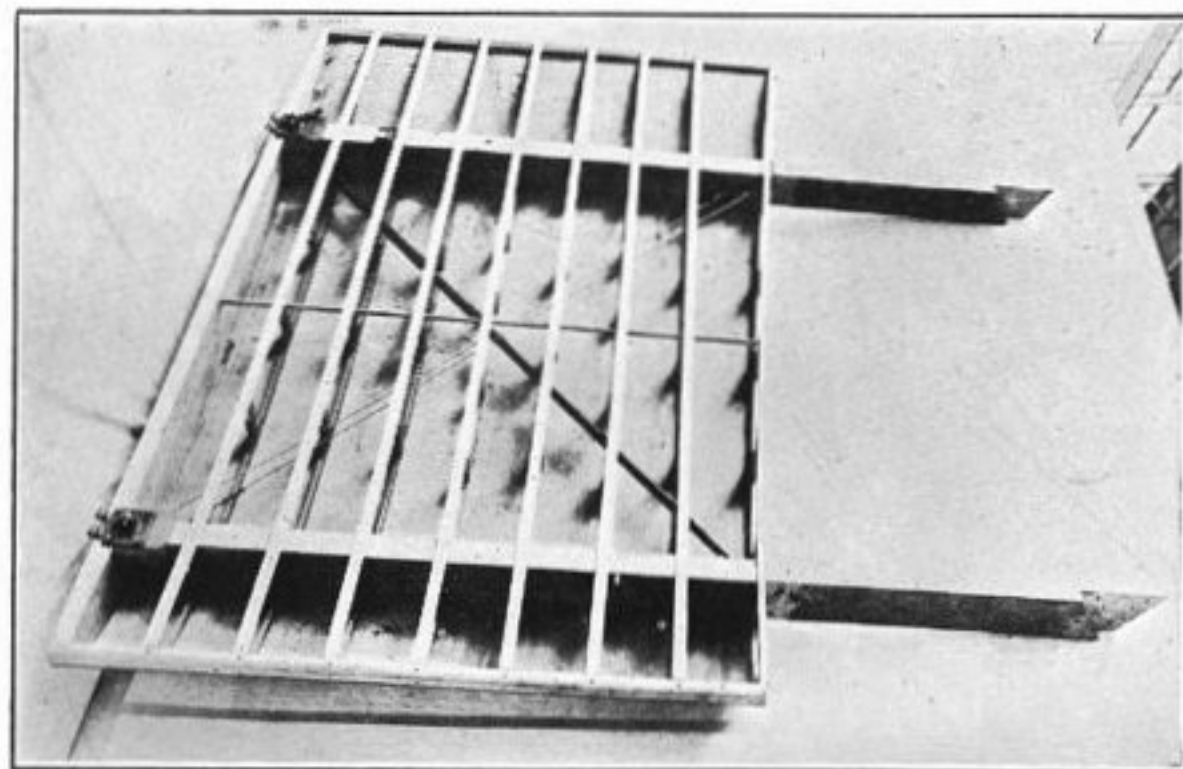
SIDEWALK PANEL REMOVED AFTER FITTING AND READY FOR UNDERSIDE COVERING. PORT PANEL TO BE MARKED "P" AND STARBOARD PANEL "S," WITH BOAT NUMBER FOLLOWING LETTER. TOP SURFACE OF THESE PANELS IS COVERED WITH VENEER.
